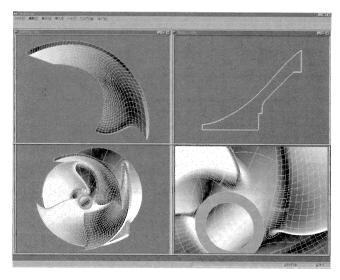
3-D CAD System Customized for Hydraulic Parts Modeling.
